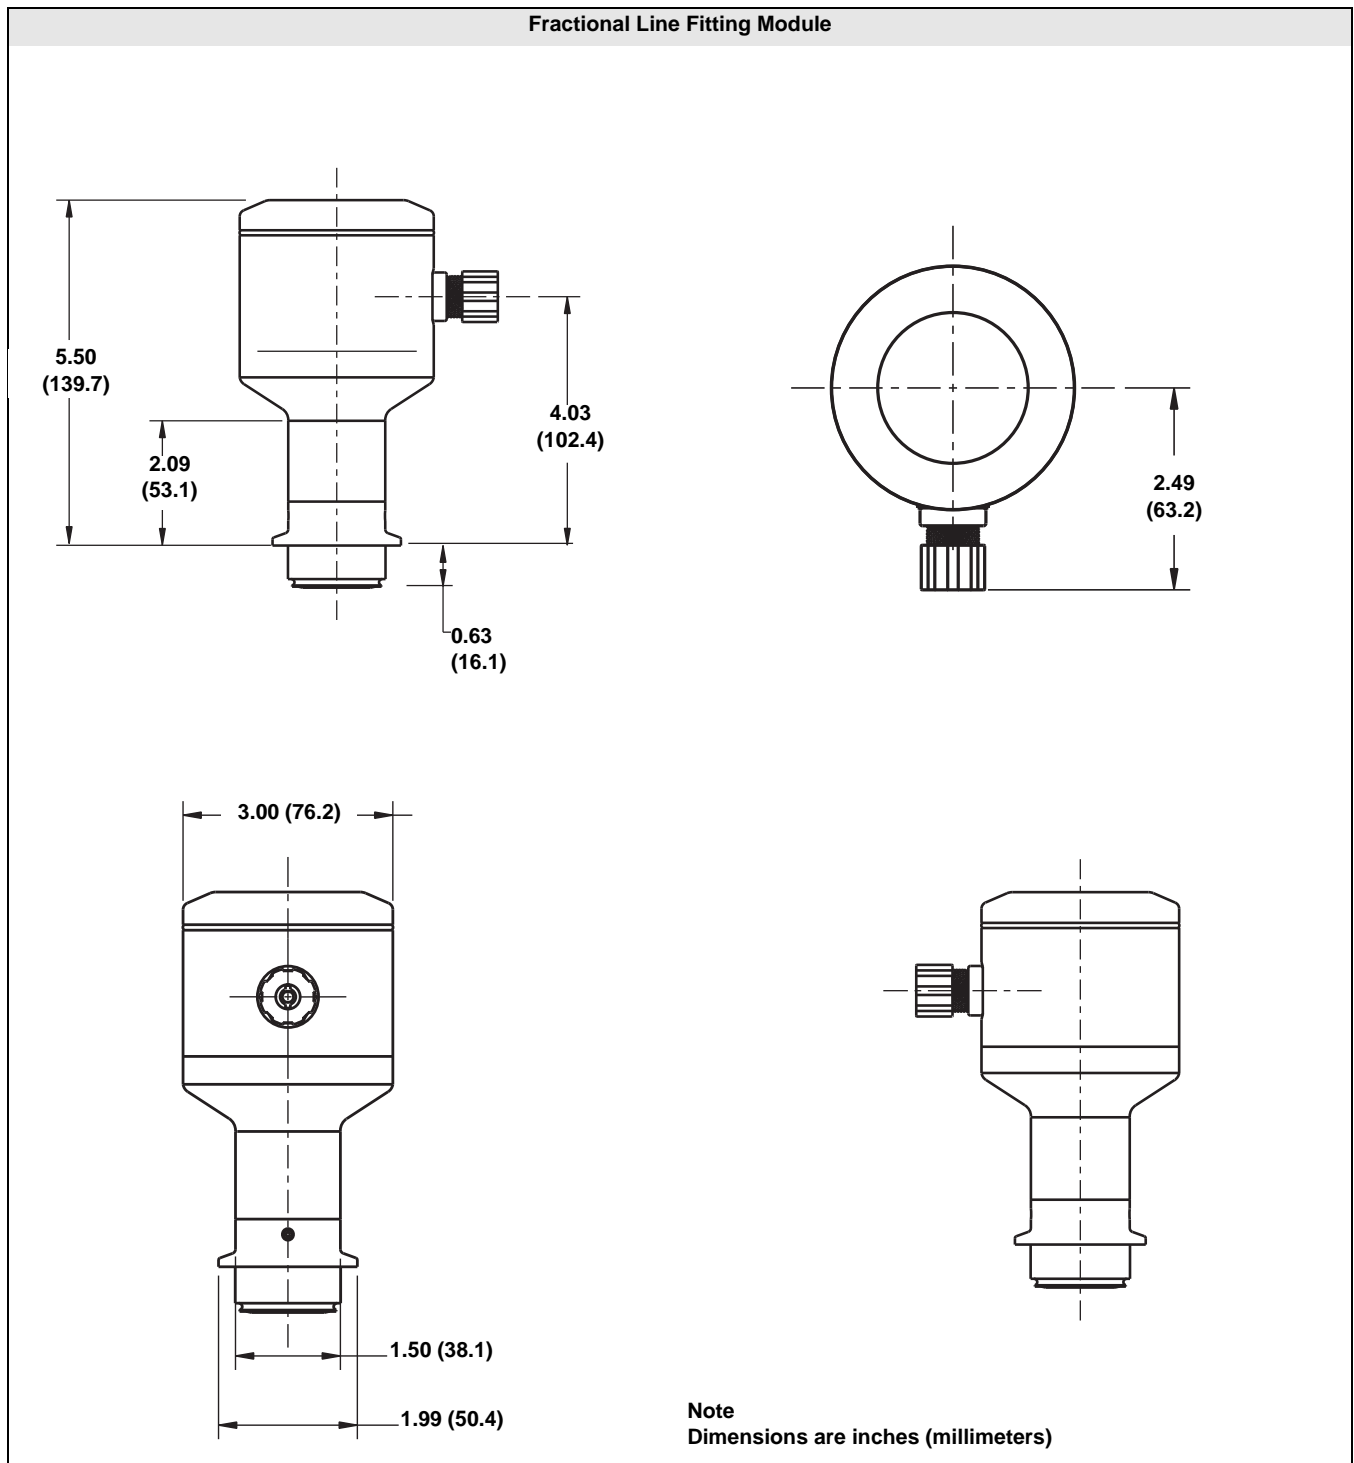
Rosemount 4500 Hygienic Pressure Transmitter Dimensional Drawings
